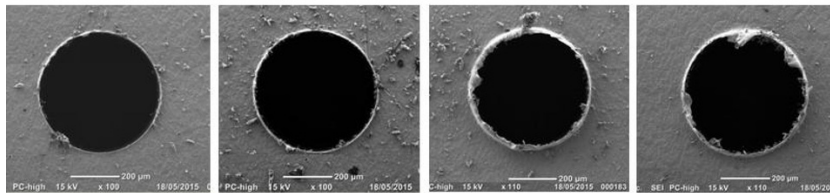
The progress of drilling tool wear with the number of drilled holes (feed-rate = 1.6 m/min and spindle speed = 90 krpm).
